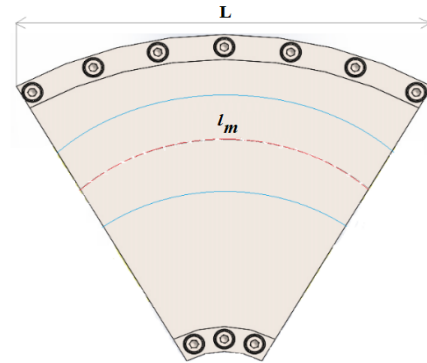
2D CAD view of the iron yoke- upper side.
